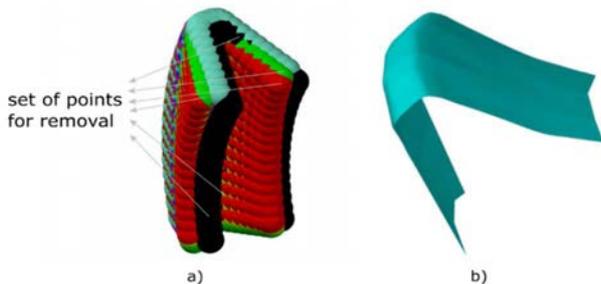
Generation of tooth gearing by a) points, b) surfaces made through points
